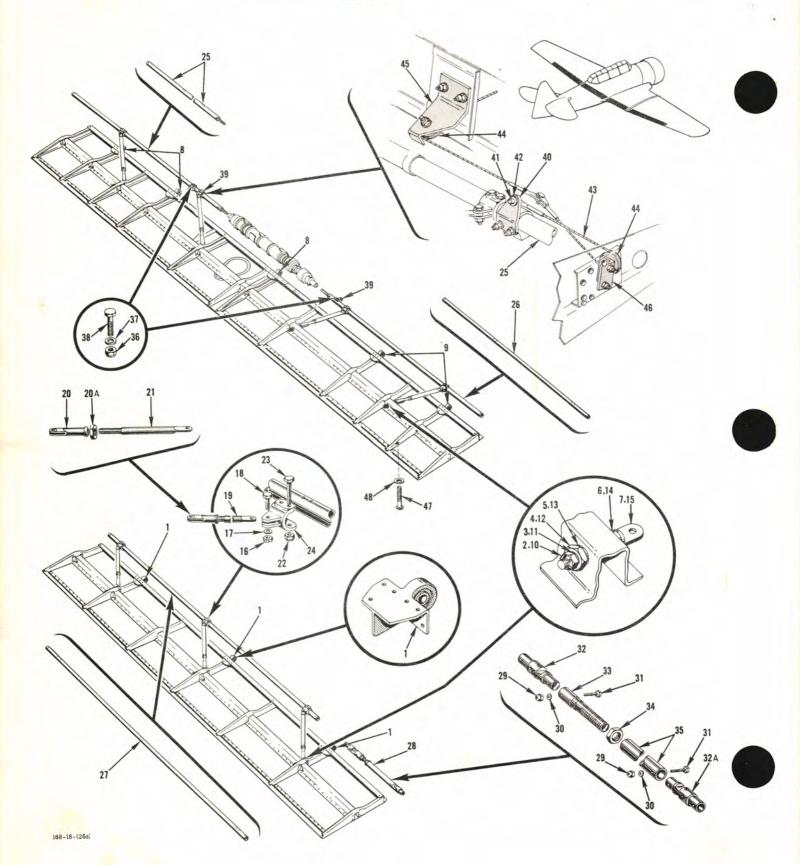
OUTER WING AND CENTER SECTION FLAPS AND FLAP CONTROL RODS
